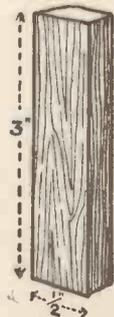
The upright support which should be a little thicker than the Head and Tail.
